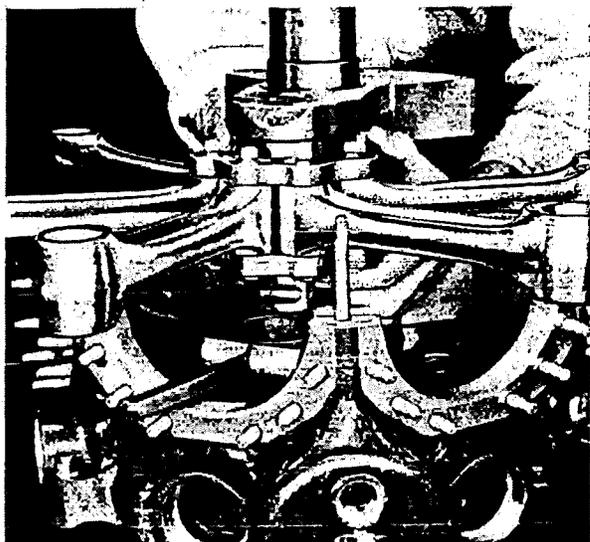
Removing Front Crankshaft, Master and Link Rod Assembly
